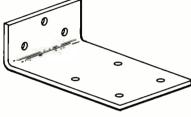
The wheel frame is a U-shaped bracket formed from a piece of sheet metal. Use the servomotor and motor bracket as a guide when drilling their respective mounting holes.
